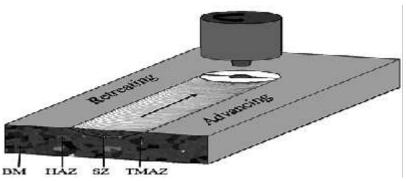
Schematic Drawing of Friction stir Welding
